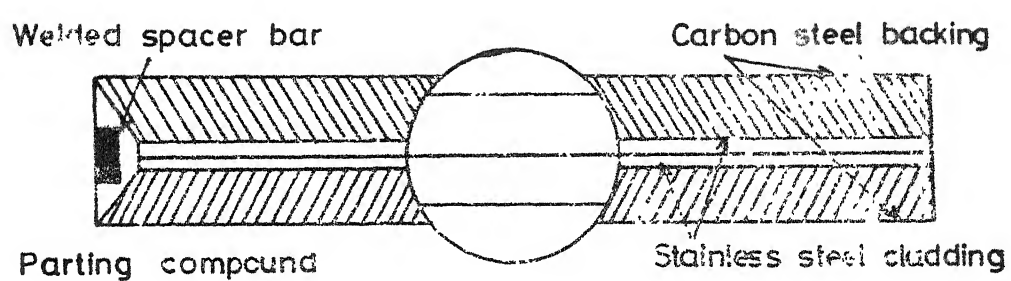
Schematic cross section of the single-clad pack prior to rolling.
